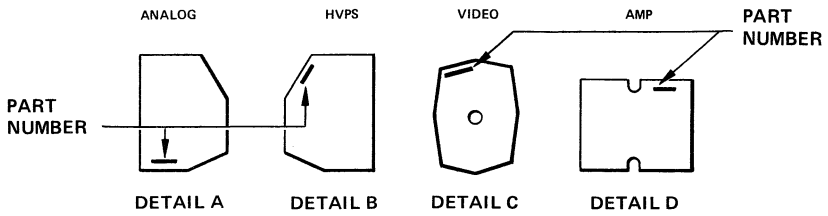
(Sheet 2 of 4). Front Enclosure Assembly
